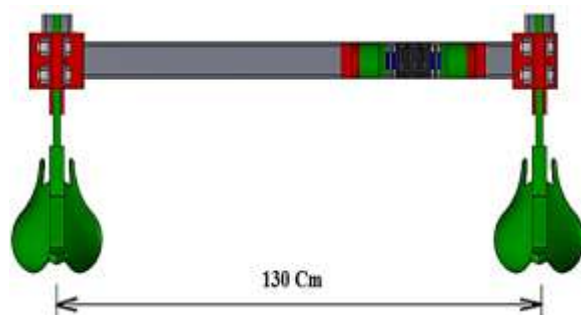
A 3D schematic drawing of the set of gears and driving wheel.
